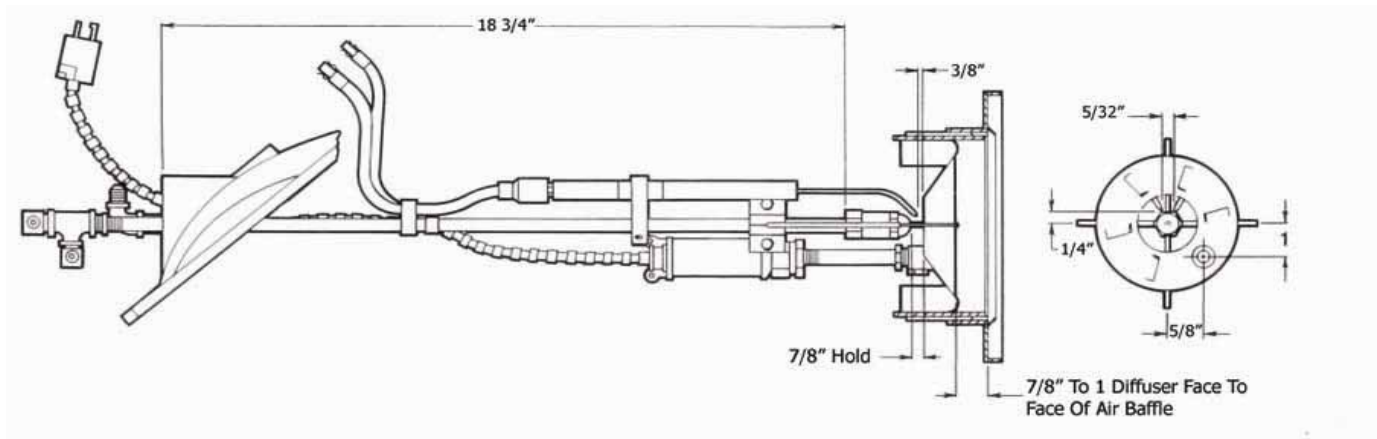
FPL 14, 17, & 20 Drawer Dimensions
